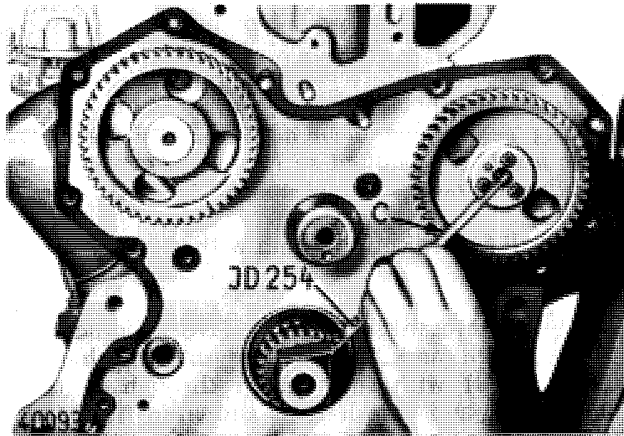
Timing Injection Pump Gear, Using Timing Tool No. JD 254
